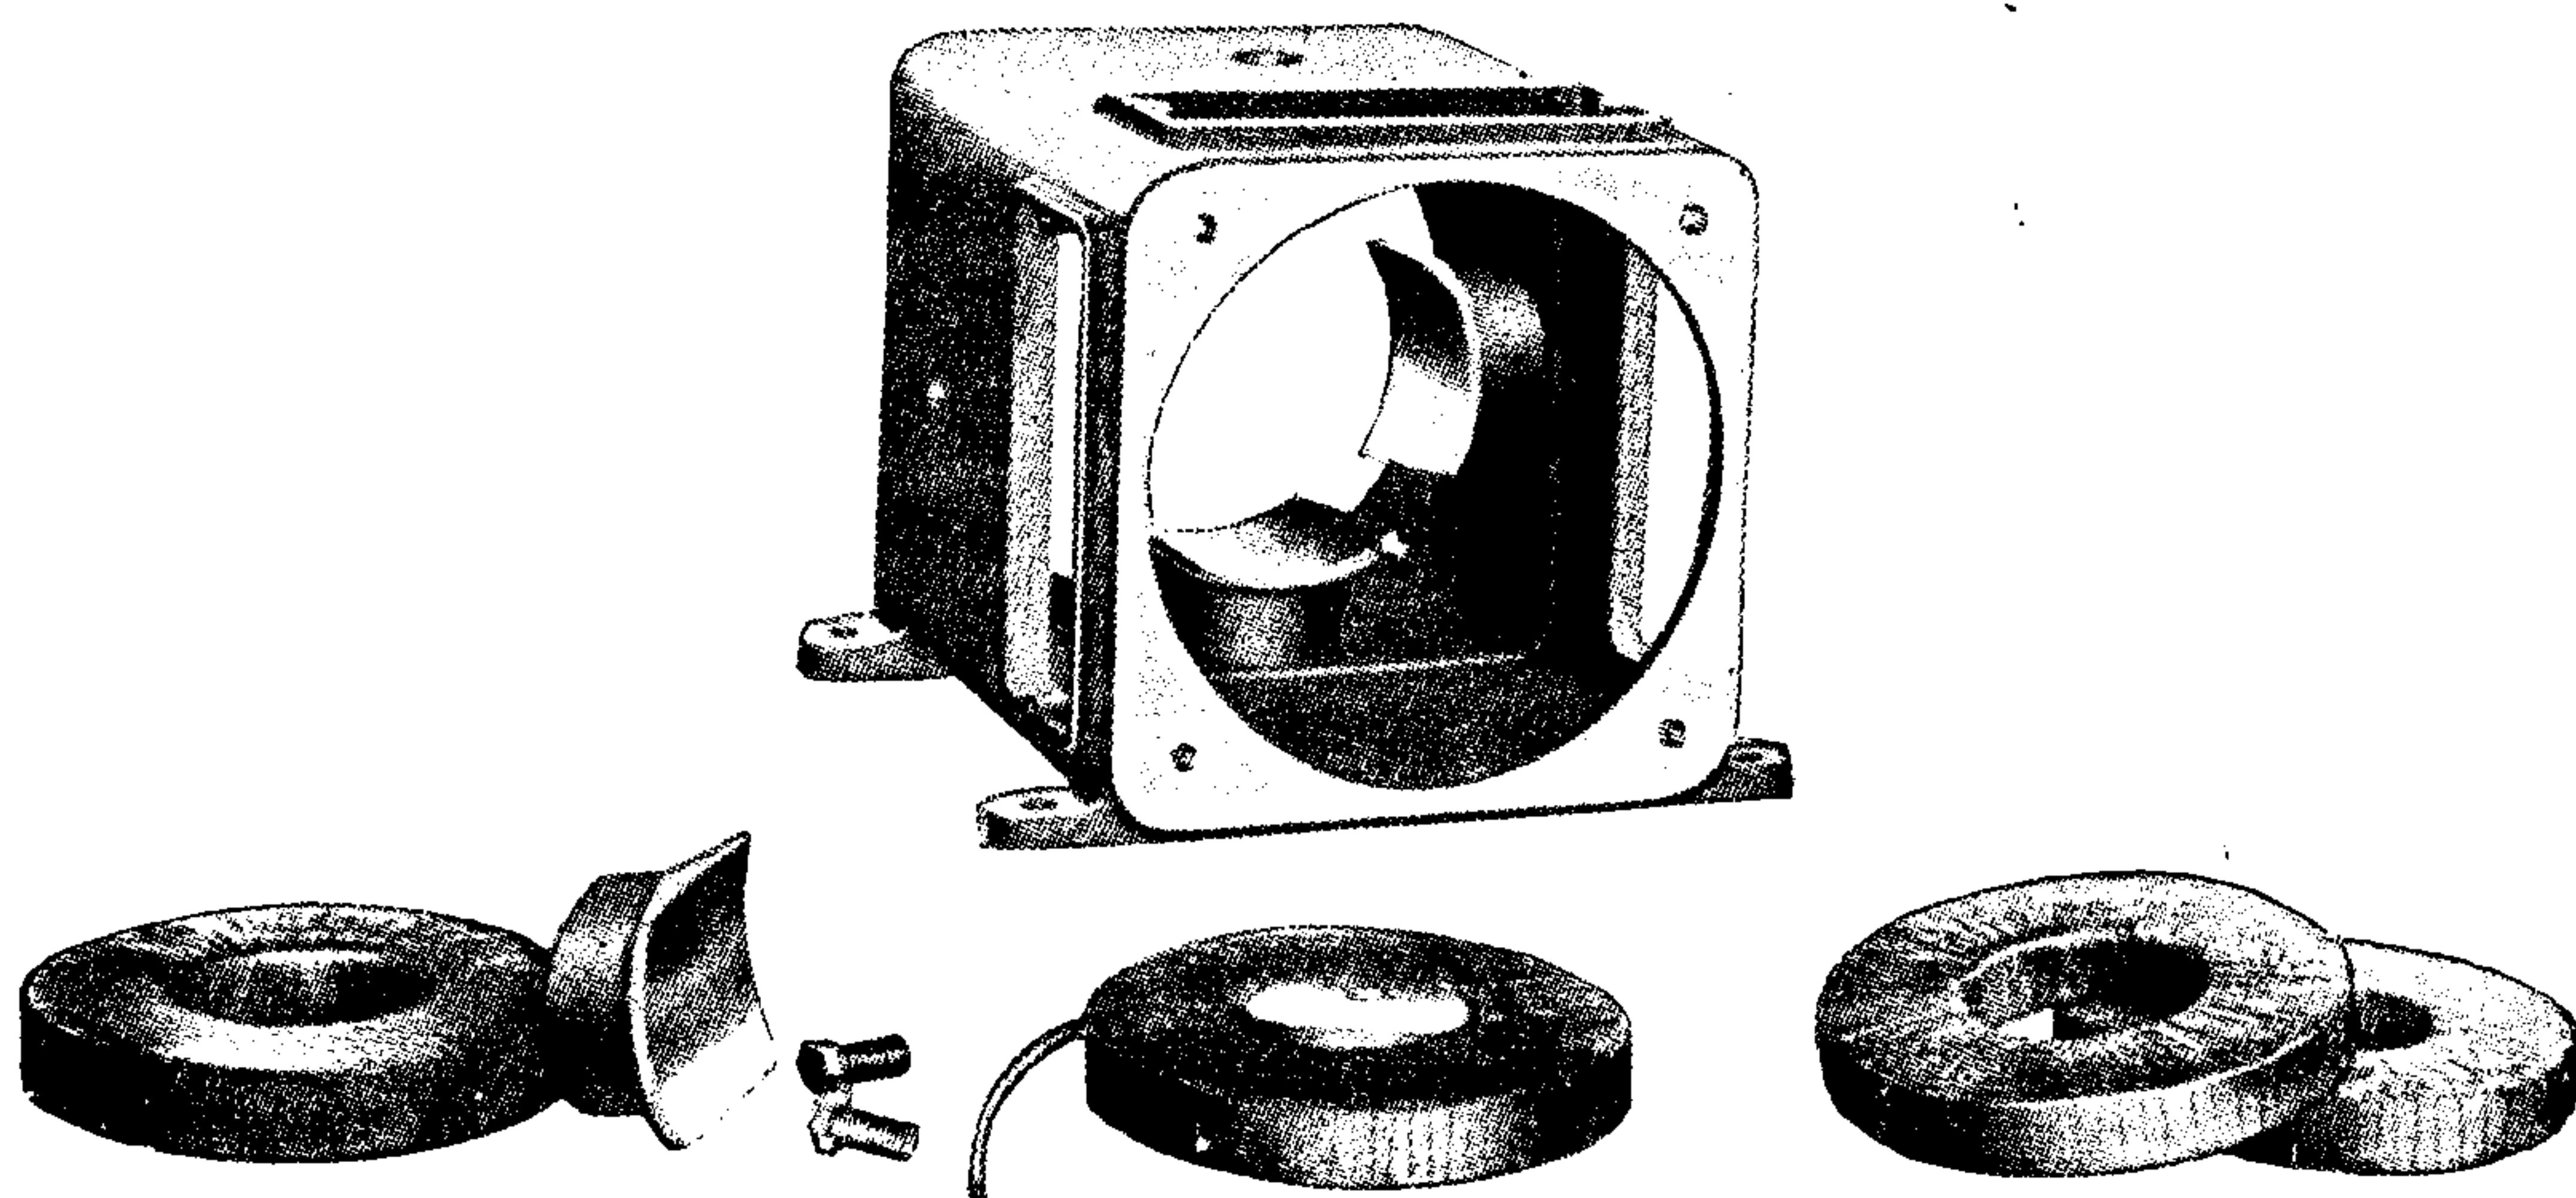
Fort Wayne Type K Motor Field Coils and Frame
